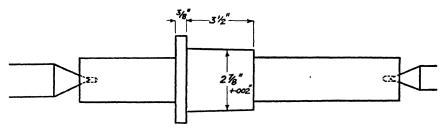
Phosphor-bronze bush on mandrel for outside machining •
